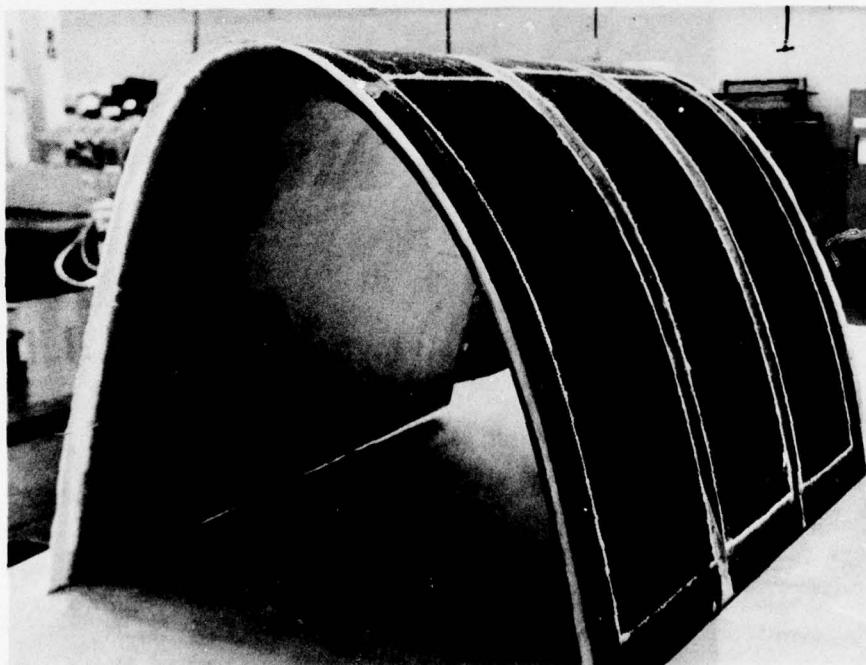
Replacement Core Installed—Assembly Ready for First-Stage Cure
